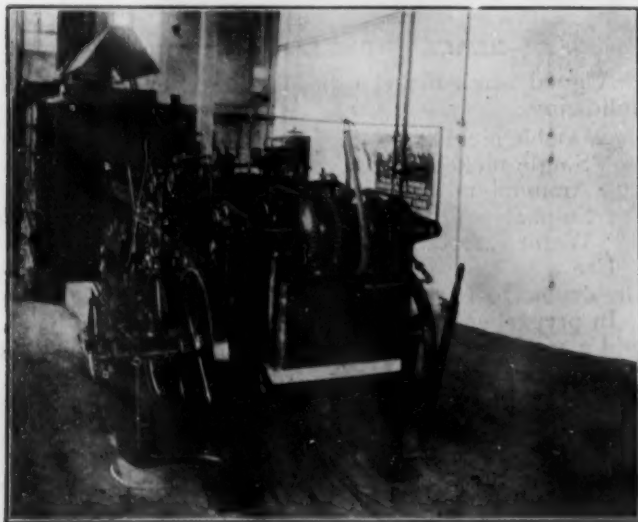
THE SHEET-FEEDING MACHINE AND COATING ROLLS.
